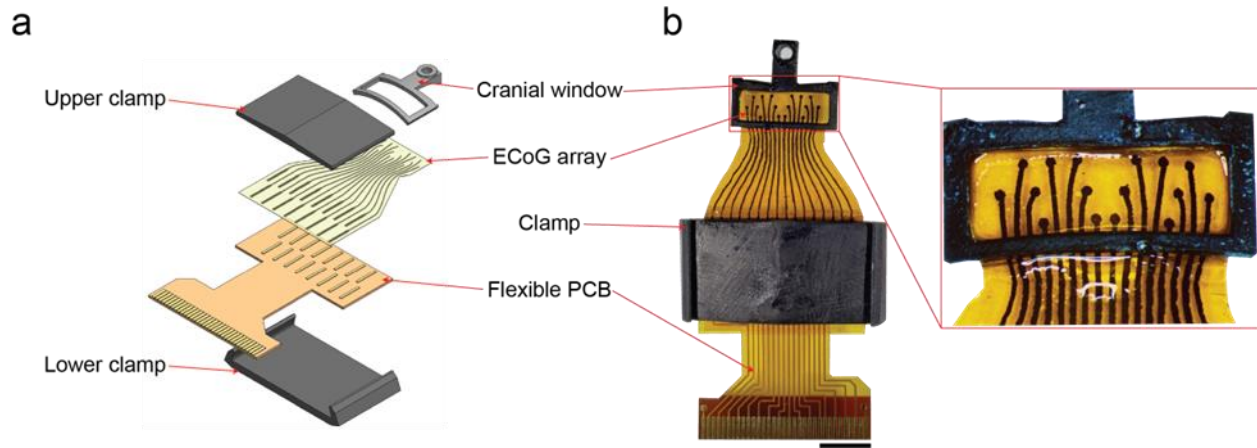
| whole ECoG device assembly: (a) CAD rendering of the whole implant assembly. The PDMS-insulated graphene ECoG electrode array is first bonded to a flexible PCB using silver epoxy adhesive to connect the electrodes with the PCB's gold pads. A 3D-printed clamp mechanically reinforces the bonded PCB and ECoG array. (b) Photograph of a fully assembled 16-channel graphene ECoG device. Scale bar indicates 5 mm.
